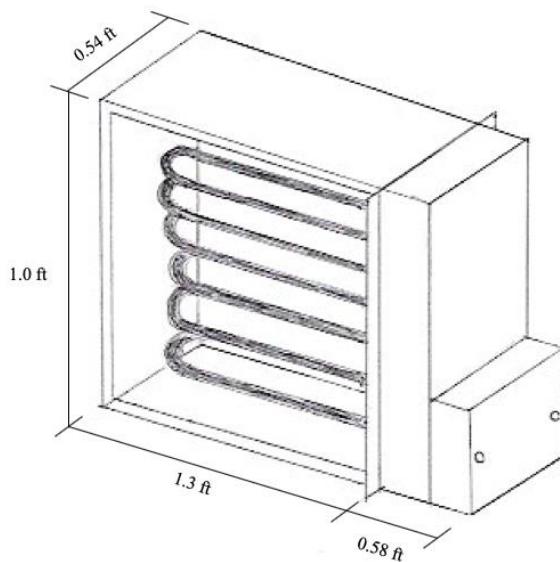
Dimensions of insert duct heater, redrawn from [4]
